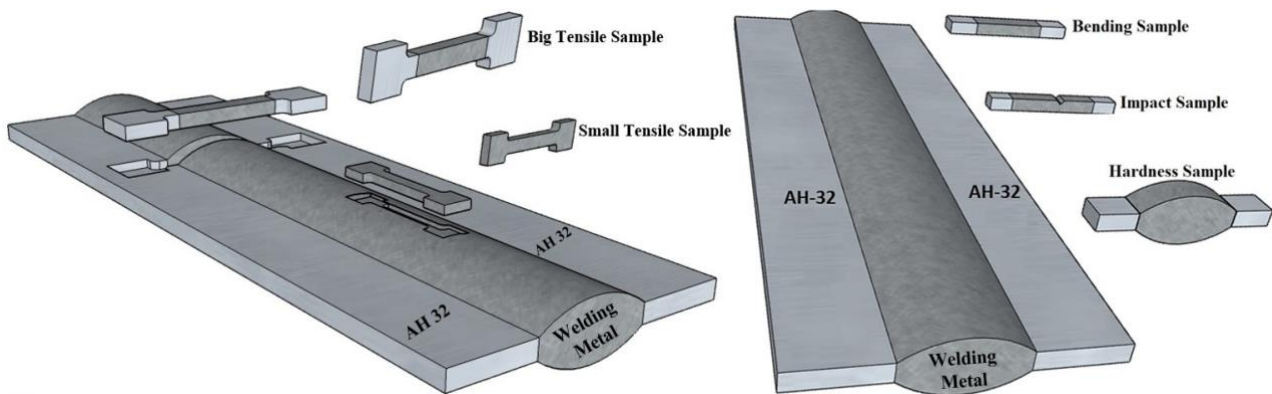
Schematics illustrations of samples removed from welded plates.
